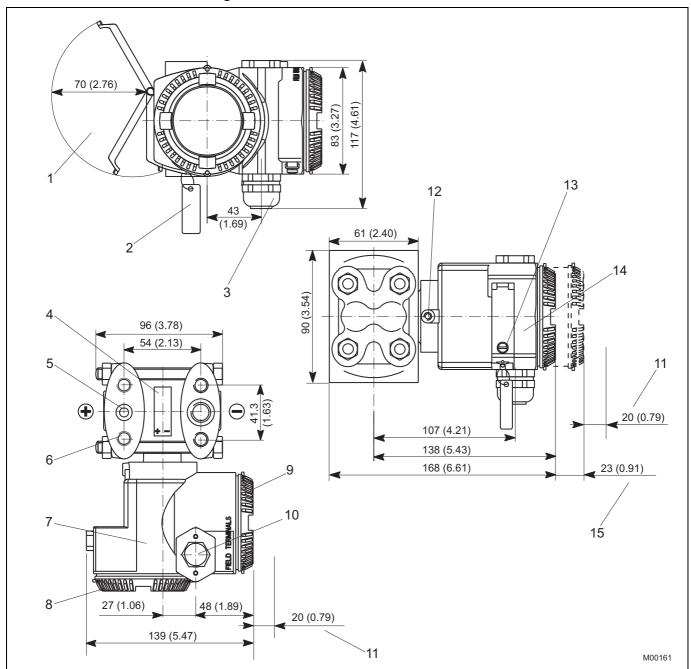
Dimensions in mm (inches), deviations in the drawing are possible
